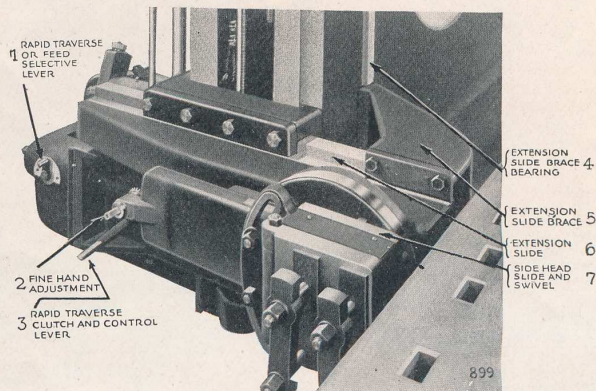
DETAILS OF BETTS PATENTED EXTENSION SLIDE SIDE HEADS FOR LARGE PLANING MACHINES
